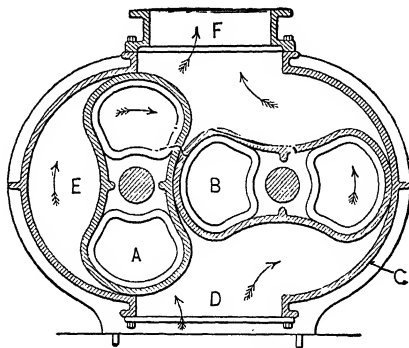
ROTARY OR POSITIVE BLOWER.
